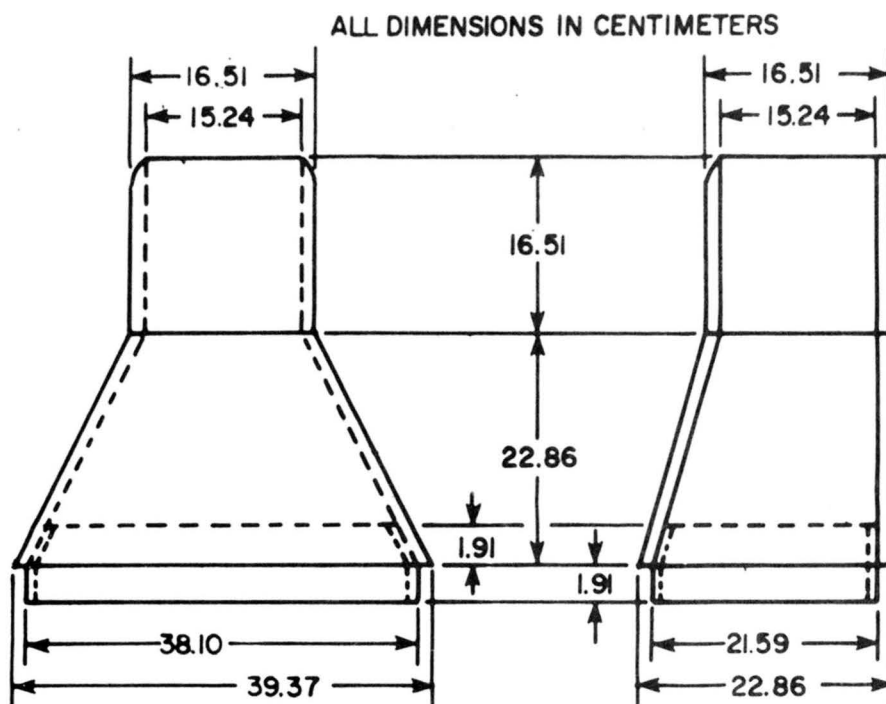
Plan and side elevation of 15.24-cm Helley-Smith bedload sampler nozzle
